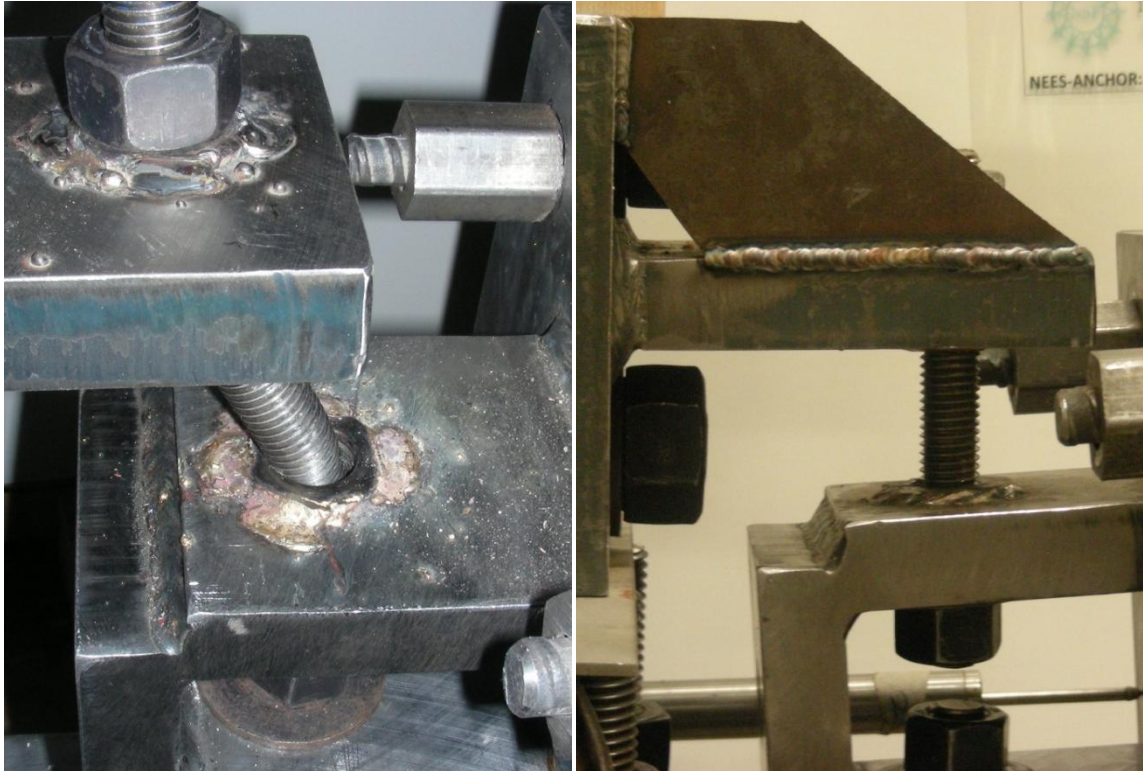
welded washers on the contact surfaces and plates welded on the fixed plates
